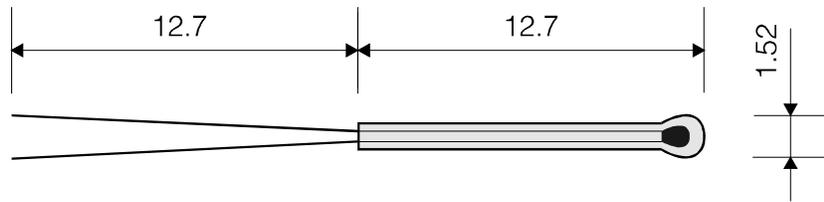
Glass coated bead thermistor probe. All dimensions in mm.
